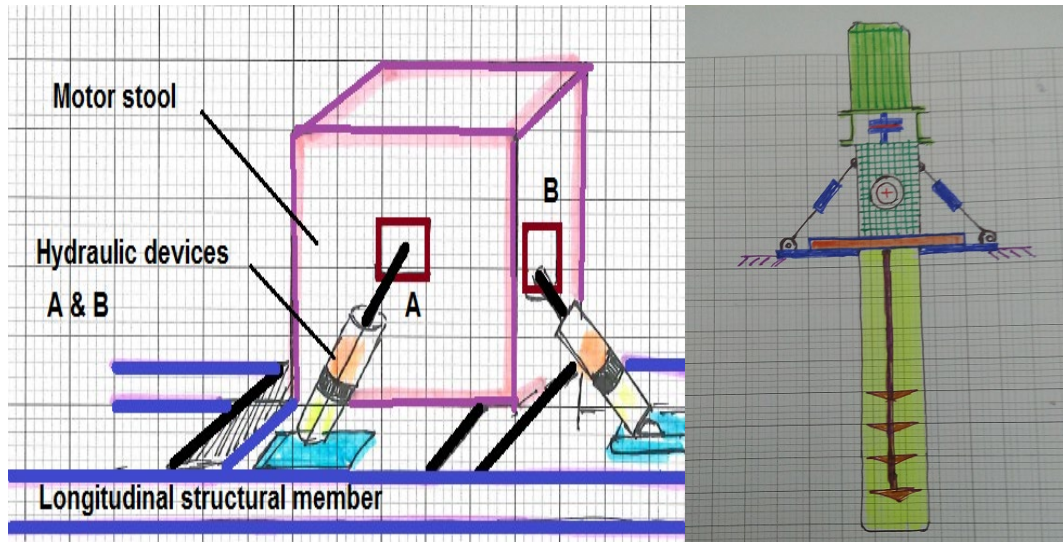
Motor Stool (left), vertical pump (right) rocking and rolling mode control
